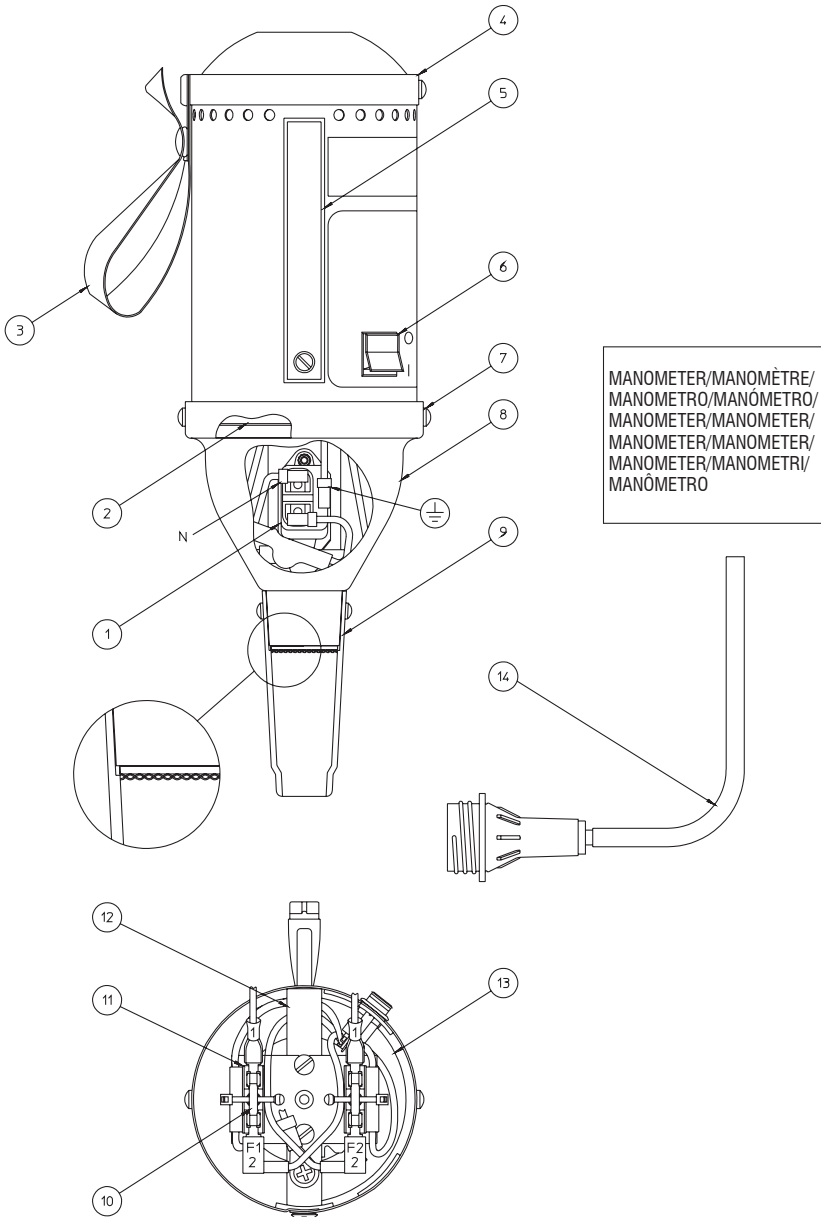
Parts Drawing / Diagrammes des pièces / Illustrazione dei componenti /
